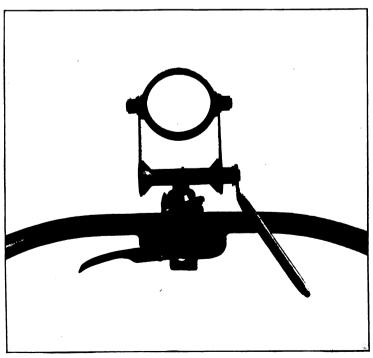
SINGLE LEWIS GUN YOKE ON FLEXIBLE GUN MOUNT, TYPE A.
